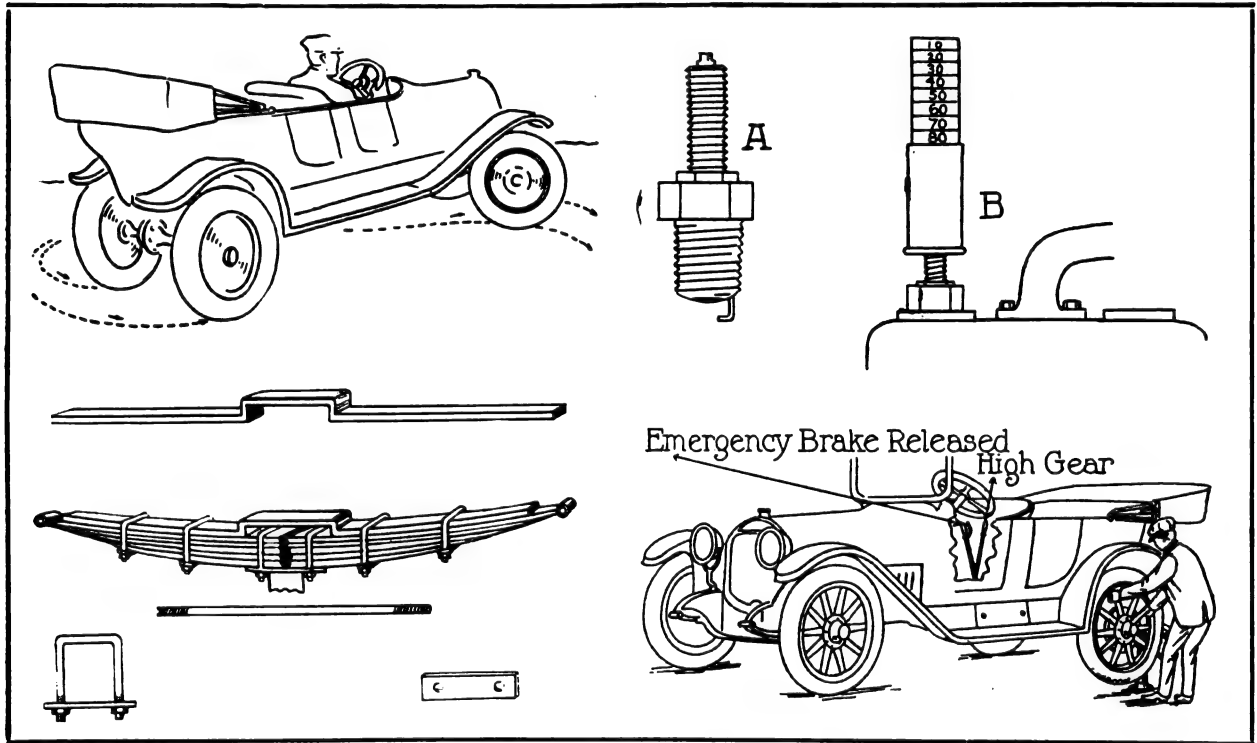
Controlling the Car While Skidding—Device for Testing Compression—Repairing a Broken Spring—Starting the Motor Without Crank or Self-Starter.
